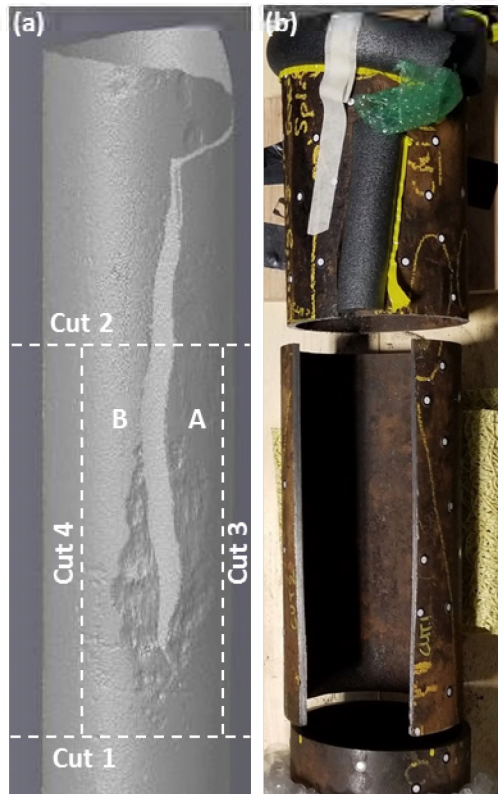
(a) Schematic and (b) Image of the Cut Locations for the Axial Fracture Surfaces
